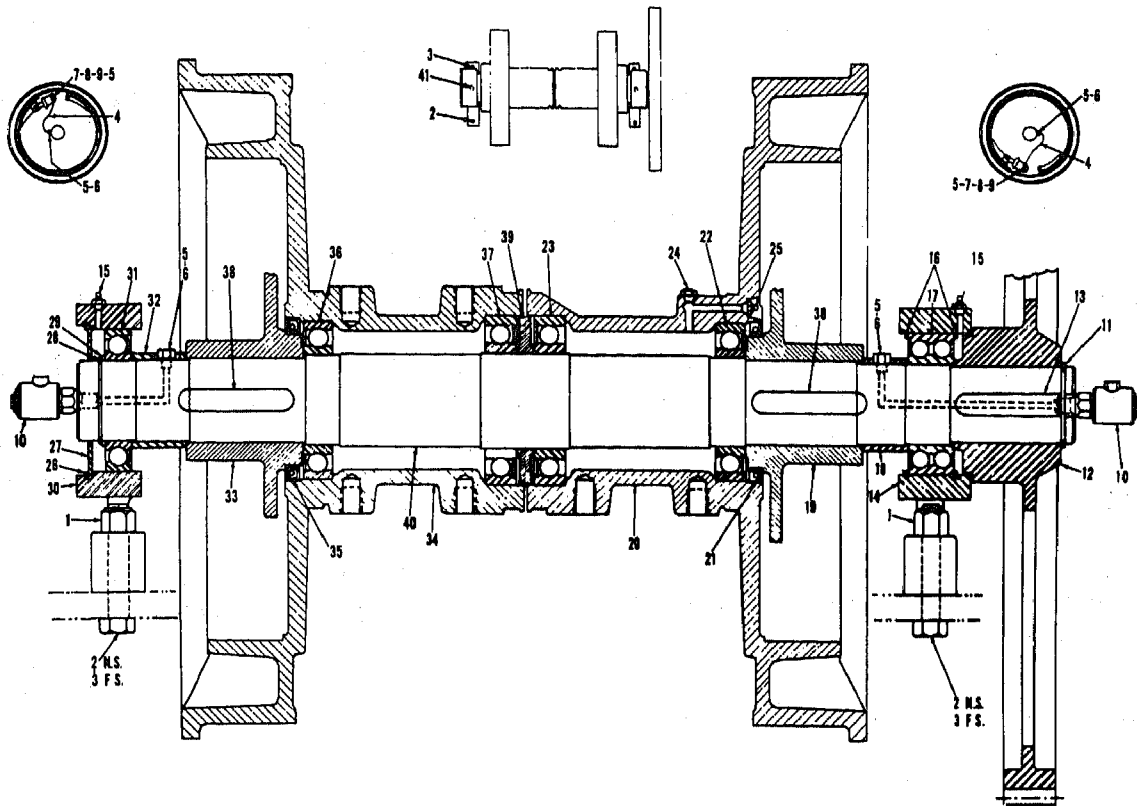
Crane hoist drum shaft assembly, removal and installation.
